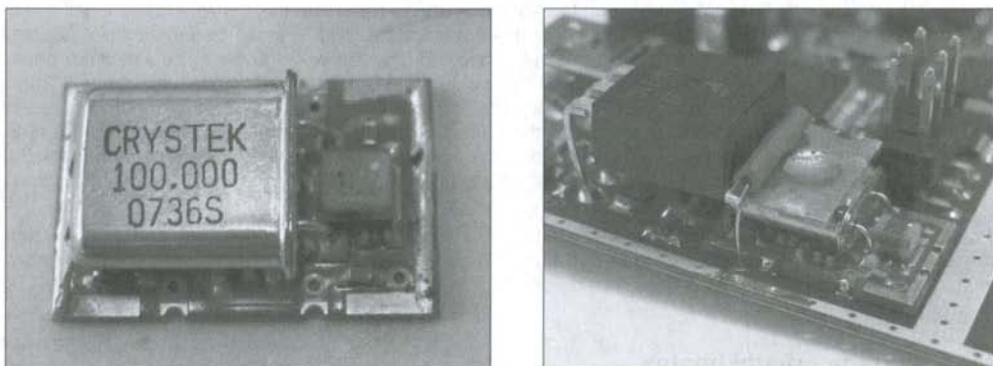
/b: On the left side the opened Crystek oscillator is visible. This oscillator is a circuit board assembled with SMD components. This board is directly soldered onto the synthesizer. The picture on the right shows how the TO-220 transistor is bent and soldered with the crystal. Above the transistor the thermistor is placed. To reduce the thermal contact between these two devices you should use thermal grease
